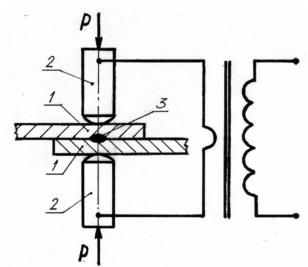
Scheme of resistance spot welding: 1 – work-piece; 2 – electrode; 3 – welded spot
